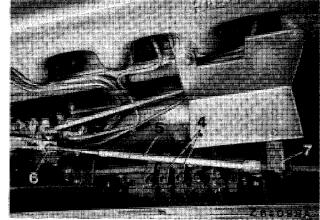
Preparing to Remove Engine at Roto-Diesel Fuel Injection Pump
